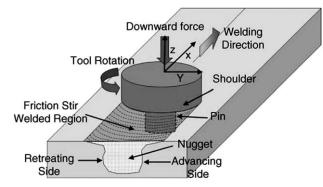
Schematic drawing of friction-stir welding⁴ Slika 1: Shematski prikaz spajanja z gnetenjem⁴
